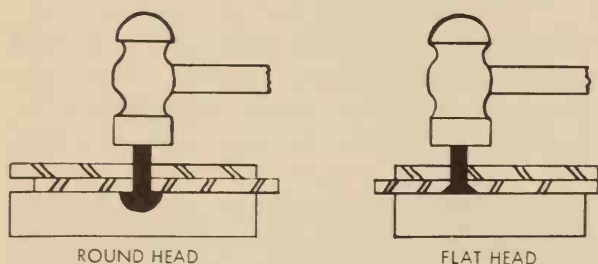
Use a riveting plate or riveting set to protect the head of the rivet.
